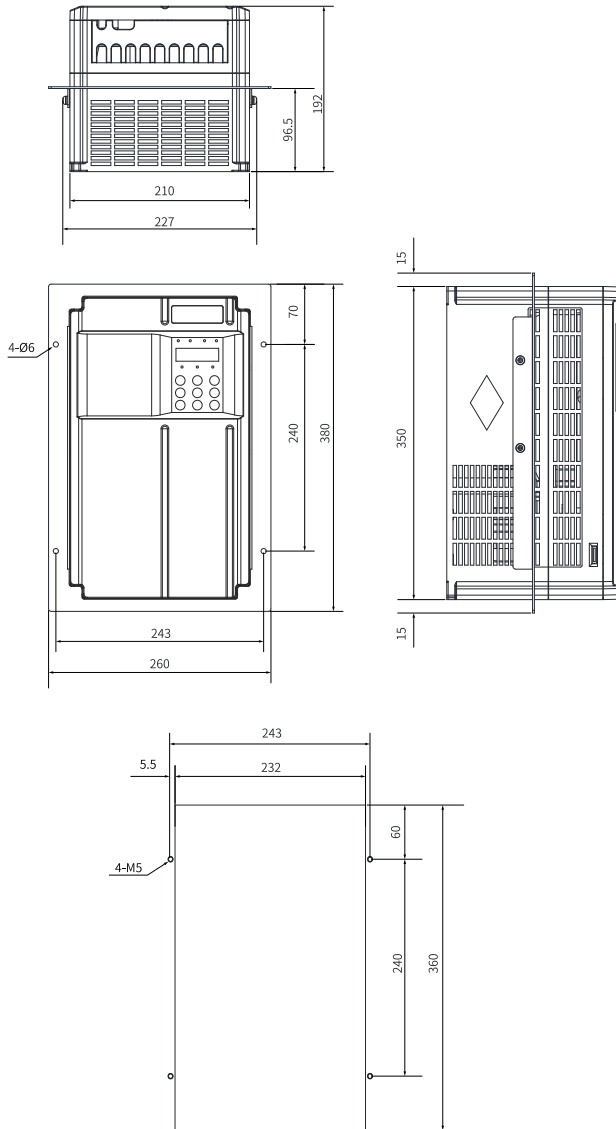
Dimensions of the MD500-AZJ-A1T5 bracket and mounting hole
